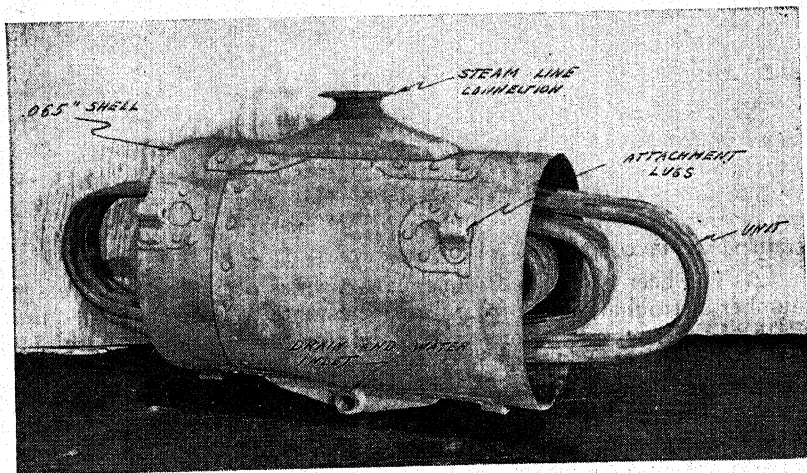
Airplane heating boiler, complete with shell and arc welded unit.
